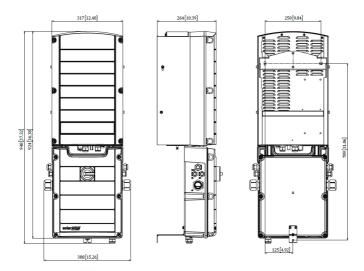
Primary Unit and Connection Unit - front, side and rear views
